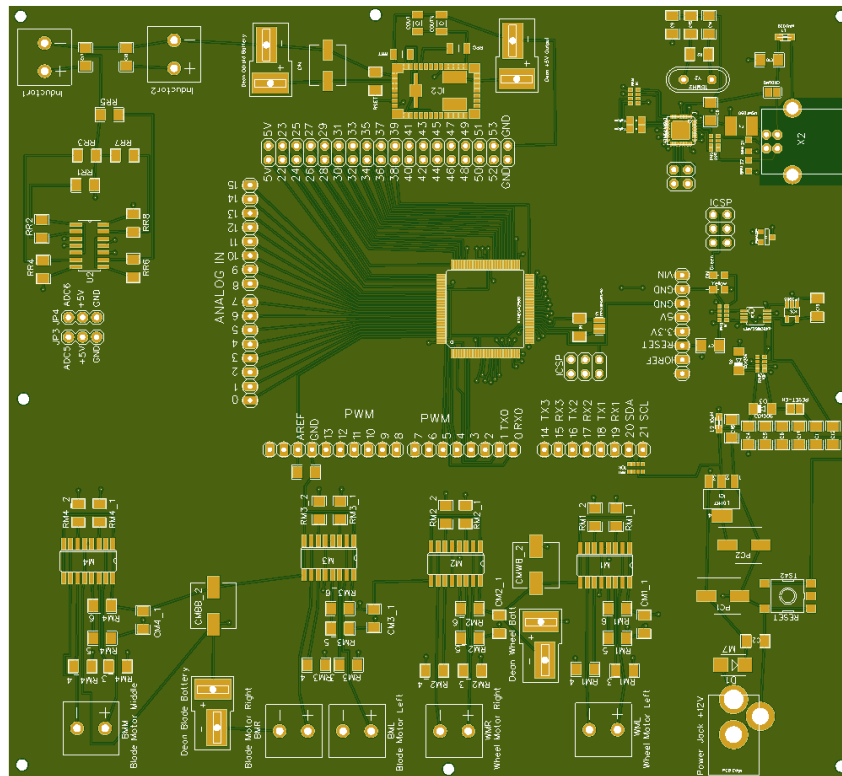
PCB of Grass Cutter System made by Brandei Dieter
